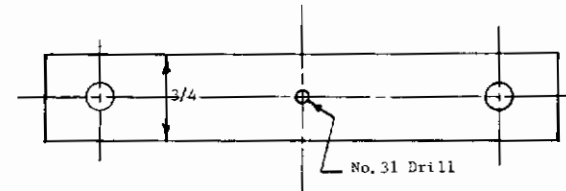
DRILLED HOLE SPECIMEN
